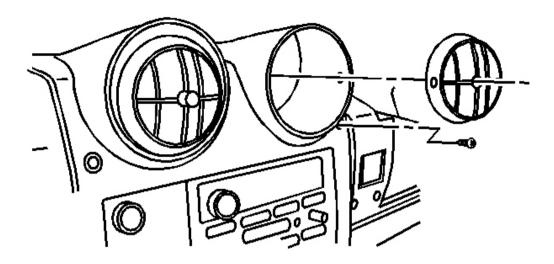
Air Deflector Louver & Instrument Panel (Center) Courtesy of GENERAL MOTORS CORP.
